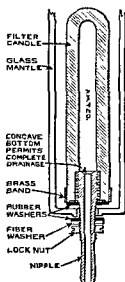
SECTIONAL VIEW OF MANDLER FILTER CYLINDER
